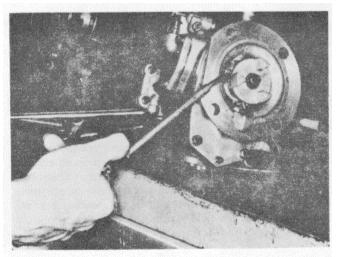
G-69. Lubricating Front Cover Tachometer Drive Gears
